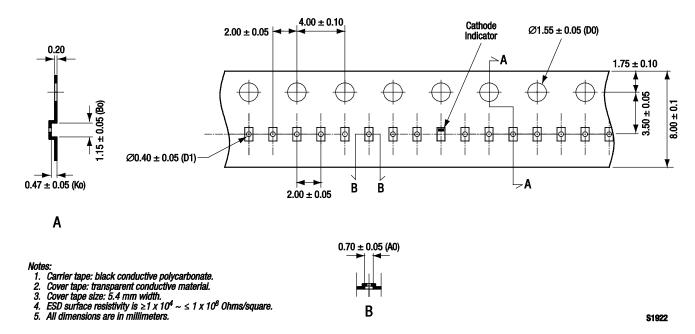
SMP1340-040LF Tape and Reel Dimensions
